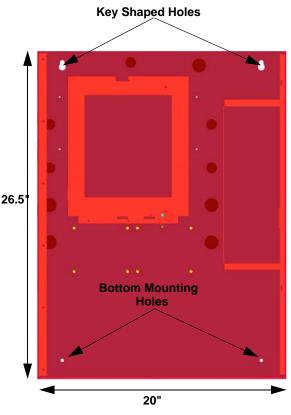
5820XL-EVS Cabinet Mounting Holes
